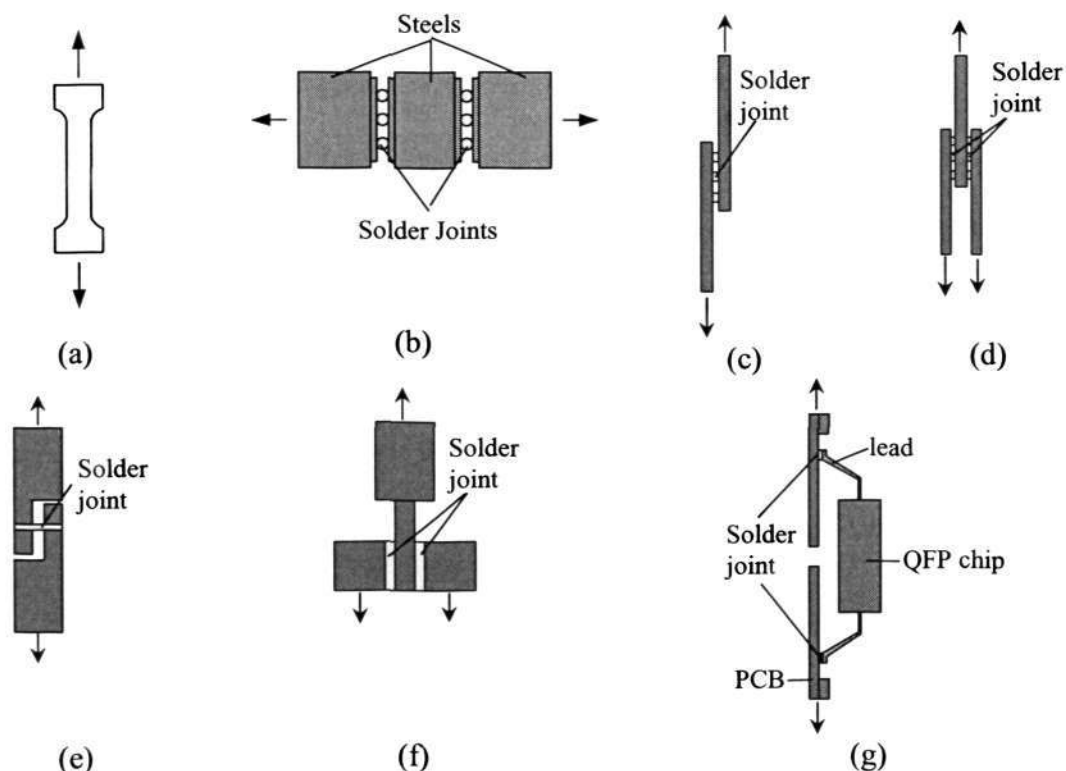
Schematic of different specimens currently used in the tests of mechanical properties (a) bulk solder (b) tensile ball (c) single shear (d) double shear (e) lap shear (f) ring-pin (g) SMT solder joints
